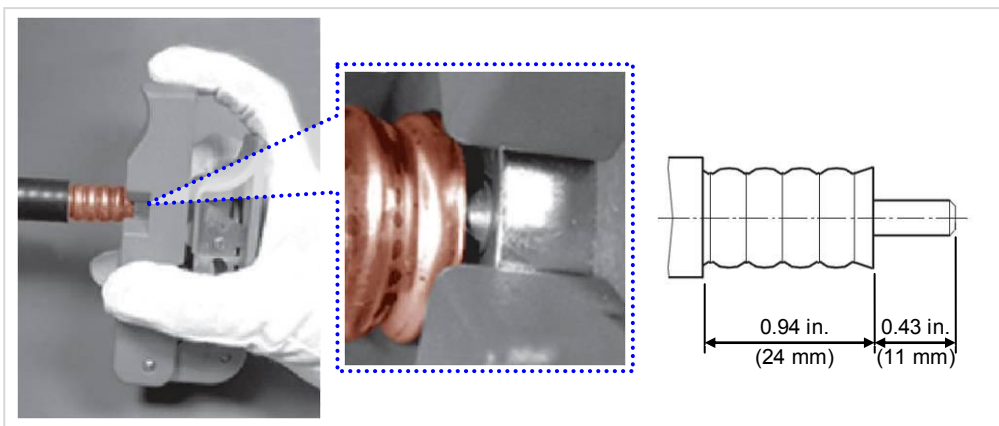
Assembling the N type-male (1/2 in. Feeder Line) Connector (2)
